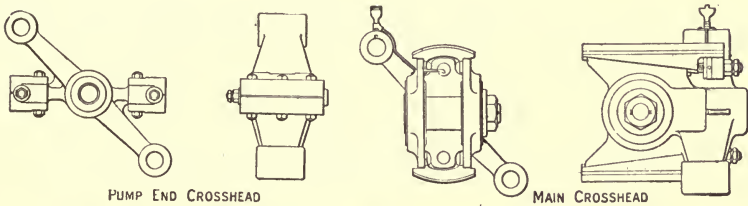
Cross Heads of Cross Compound Pumping Engines.
